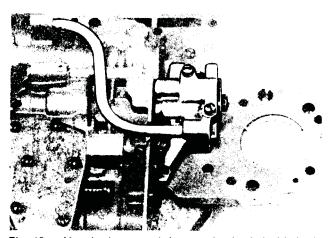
New lock-up module on valve body holds lockup valve, fail-safe valve.
